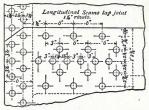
Longitudinal seams of the boiler shown in Figs. 124 and 125.
